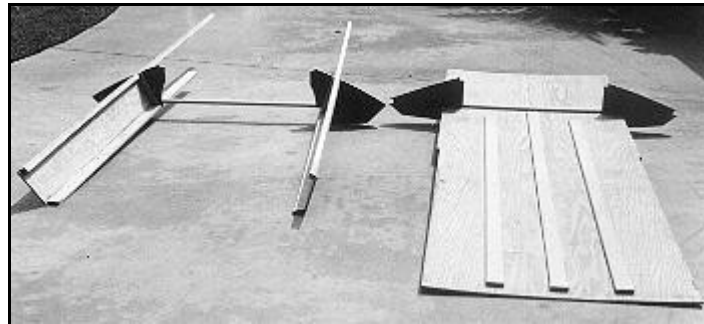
The three bottom battens are assembled to the bottom planking as shown. The sub-assembly of the side planking/chine and sheer clamp is then mounted to #1 Frame. The chine ends at Frame #2, while the sheer clamp is allowed to run wild for later trimming.
